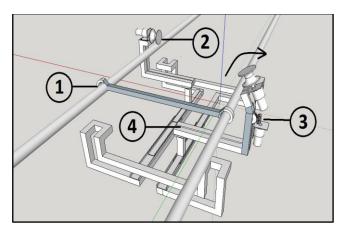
1. Spacer, 2.U-Grooved Wheel, 3.Gear Assembly, 4.Main Chassis [8]
